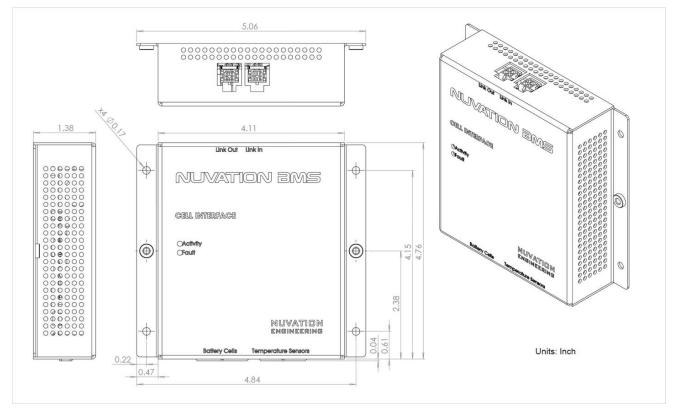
Mechanical Drawing of Cell Interface with Bulkhead Enclosure
